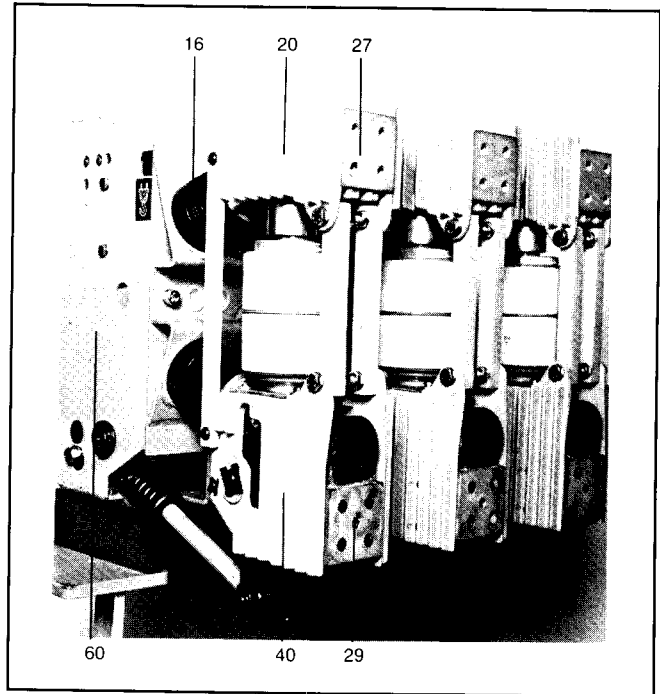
Typical Interrupter/Operator Subassembly For 5-3AF-250
